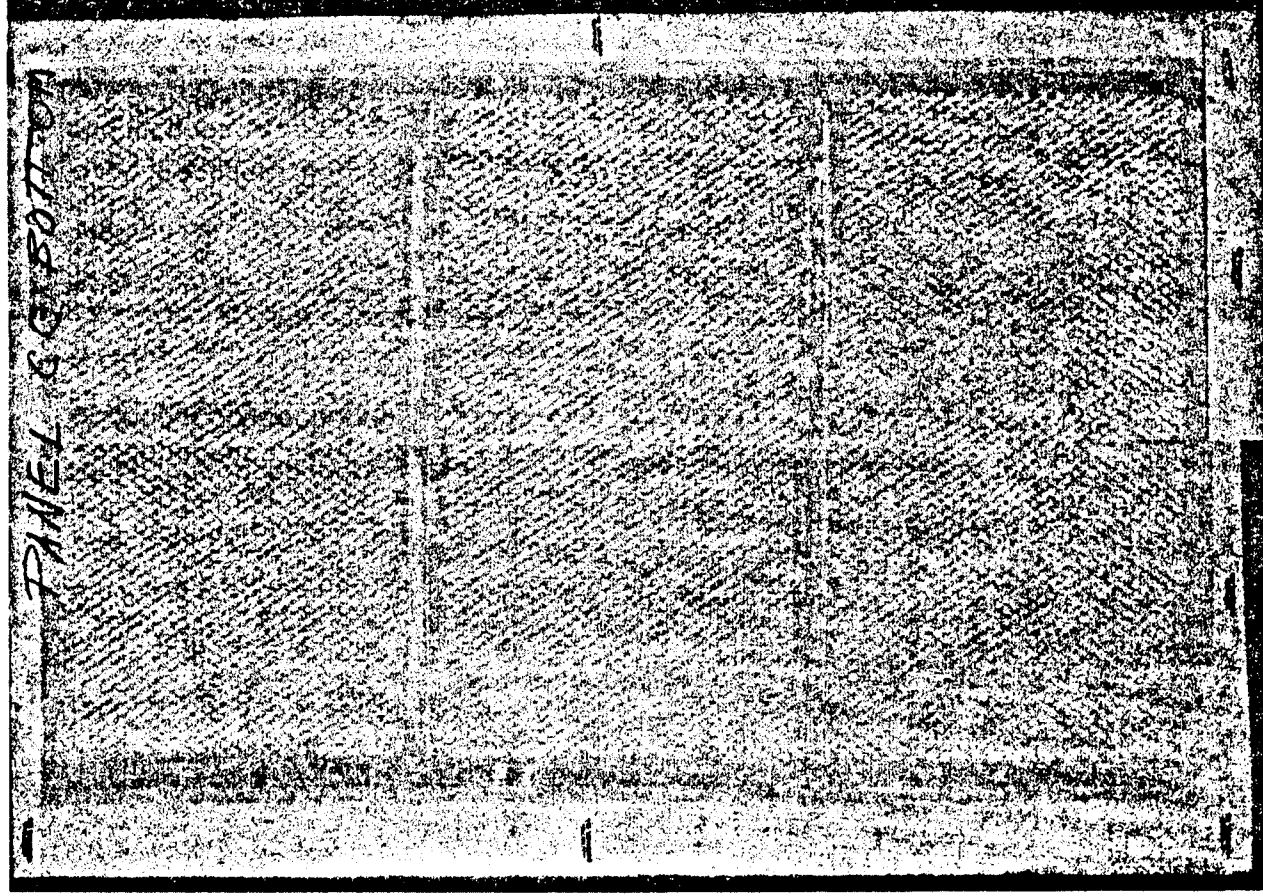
Ultrasonic Inspection Report of Bottom Face (in Retort) of Panel CC. Panel CC had 7039 Faces, 6951 Core, 719 Brazing Alloy, and a Section of it had Edge Members. It was Furnace Brazed.
